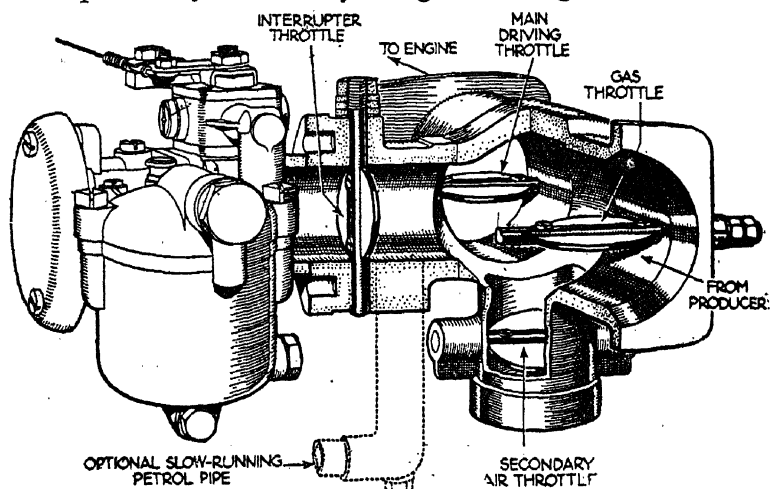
The Solex Petrol-Producer Gas Carburettor.
